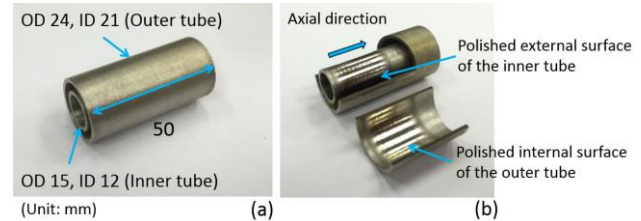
Results of (a) 3D AM double-layered tube workpiece and (b) workpiece after polishing.
